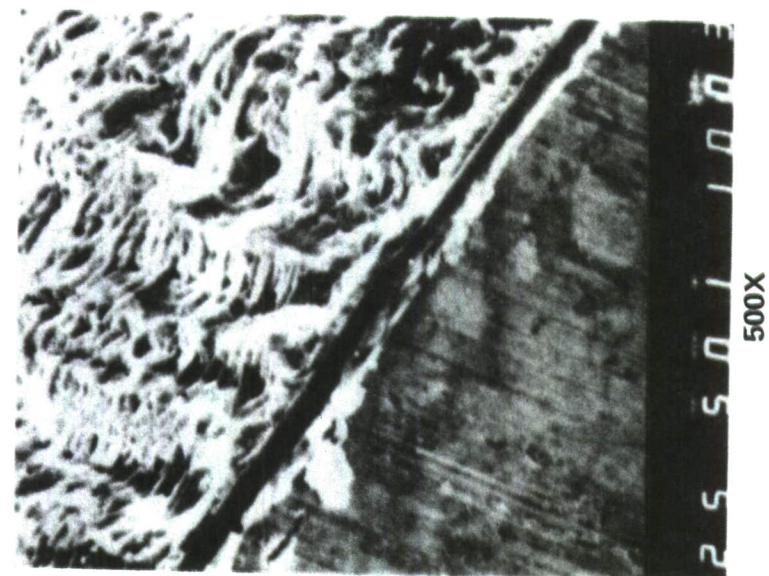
Fatigue Crack Initiating from a Scratch in a Drilled and Reamed Fastener Hole
